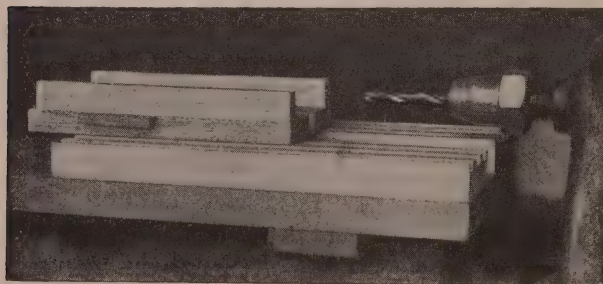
Fitment for Boring Dowel Holes in Lathe
